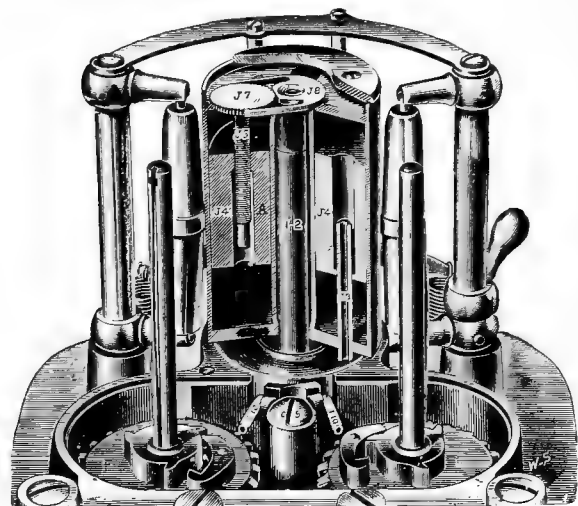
Paper Drum of Boyer Speed Recorder. Chicago Pneumatic Tool Company.
